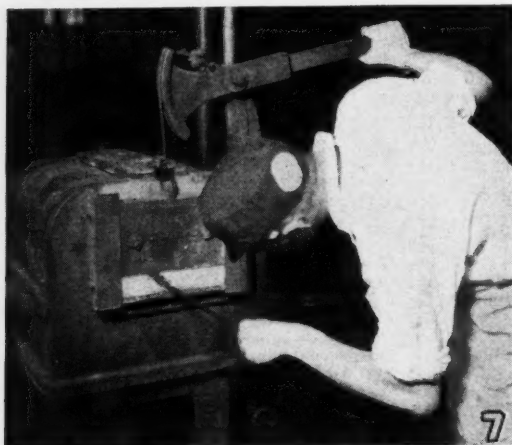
Actual practice in the heat treatment of tools and small parts forms a part of the course. Two furnaces and a forge provide the necessary equipment.
